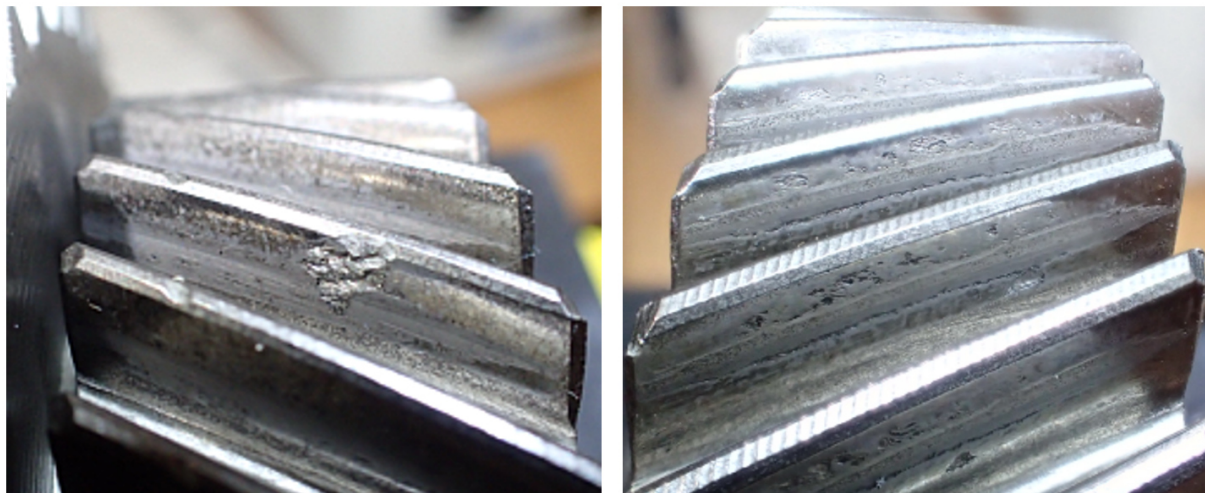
Pitting on serial gearwheels (pinion left) of 3rd speed – gearset 1 - after 52 hours. Pitting was detected already after 43 hours.
